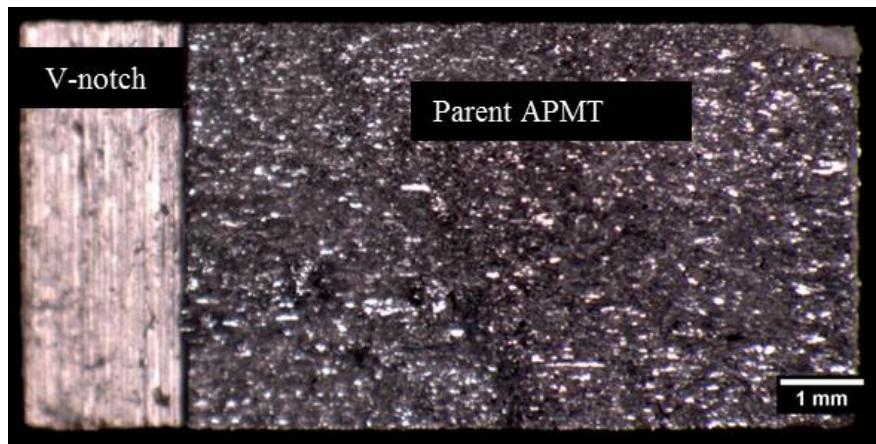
Optical macrograph of the fracture surface from a V-notch Charpy impact test of the as received APMT plate.
